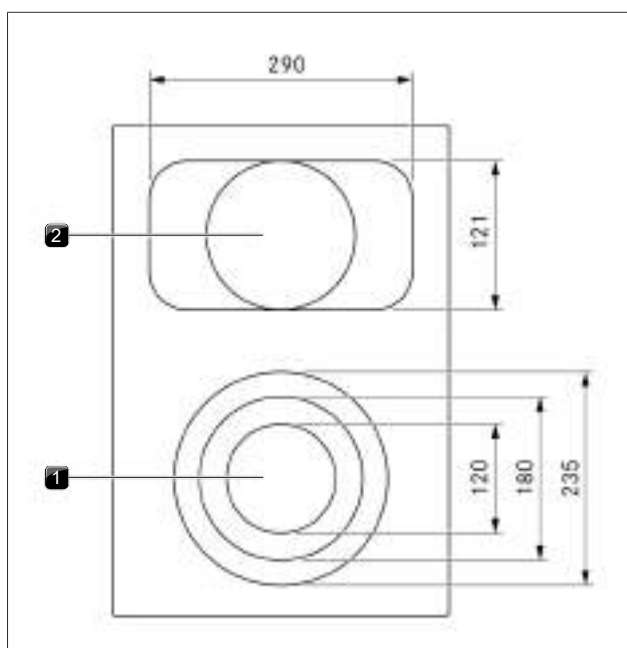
Layout of cooktop PKCB3 and cooking zone dimensions
